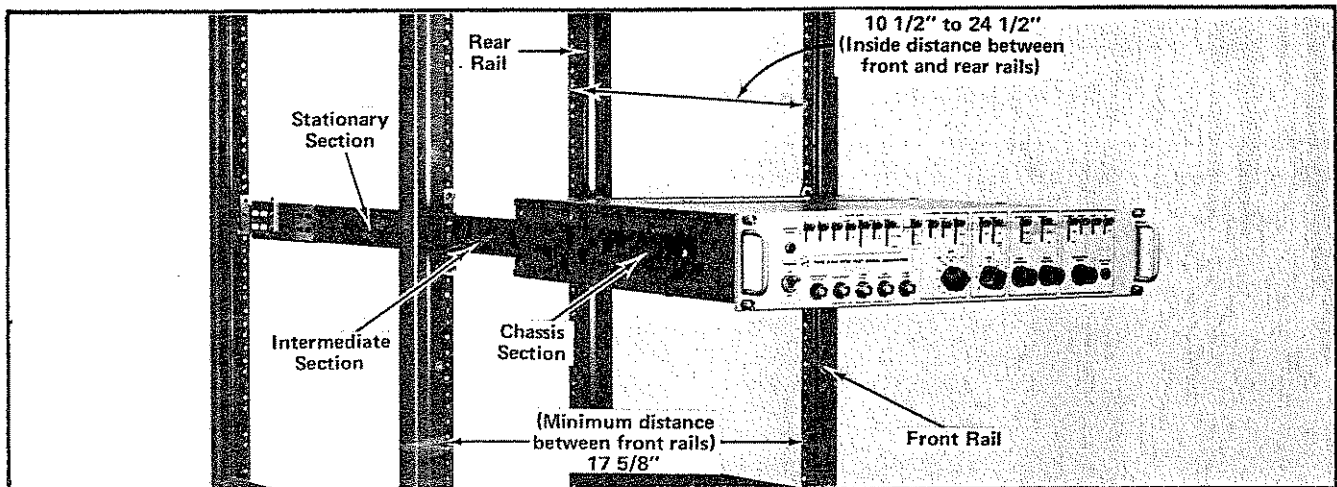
The generator shown in the fully extended position. The cabinet rack slides have been removed from the rack to show mounting.
